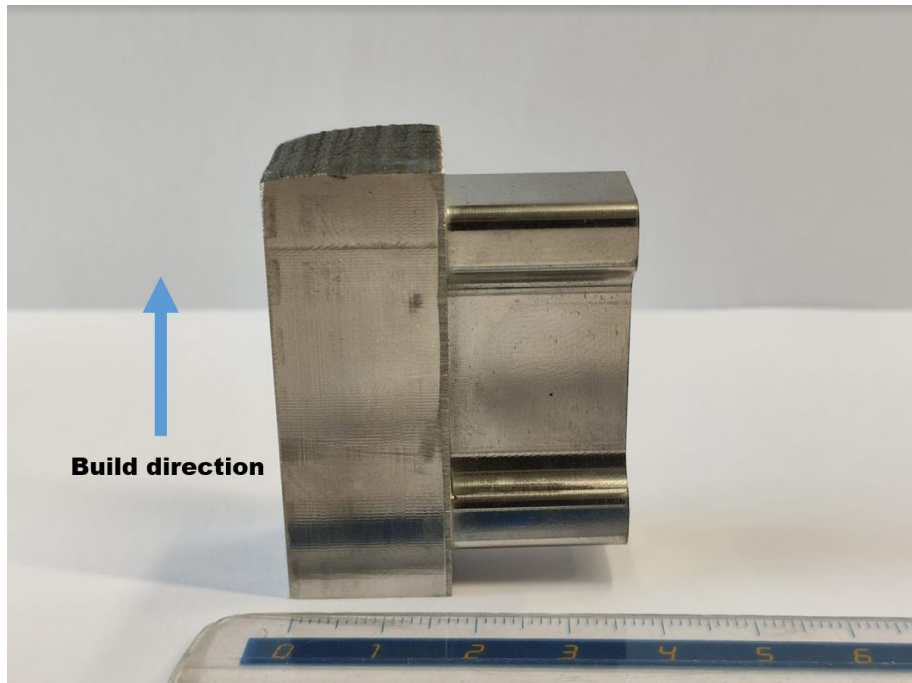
Samples cut out from a block printed with LMD technology in the „Z“ direction prior to EDM slicing
